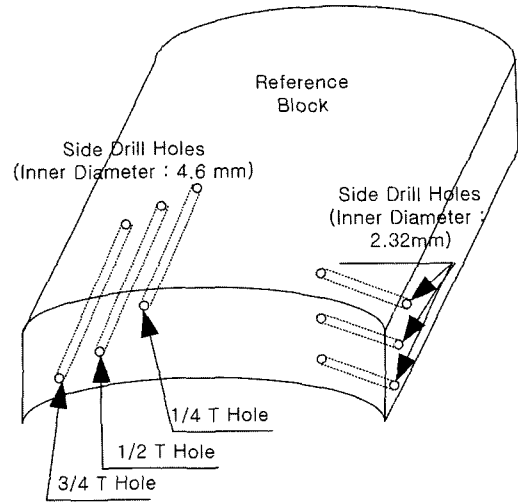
Drawing of the a sample 2 (Reference Cal. Block)
